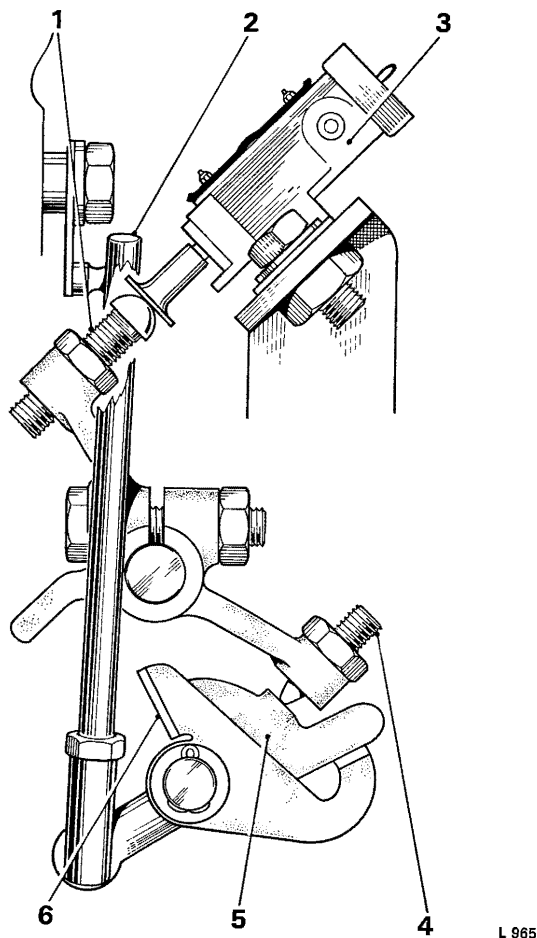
FAST-IDLE MECHANISM AND VACUUM RETARD TAP
